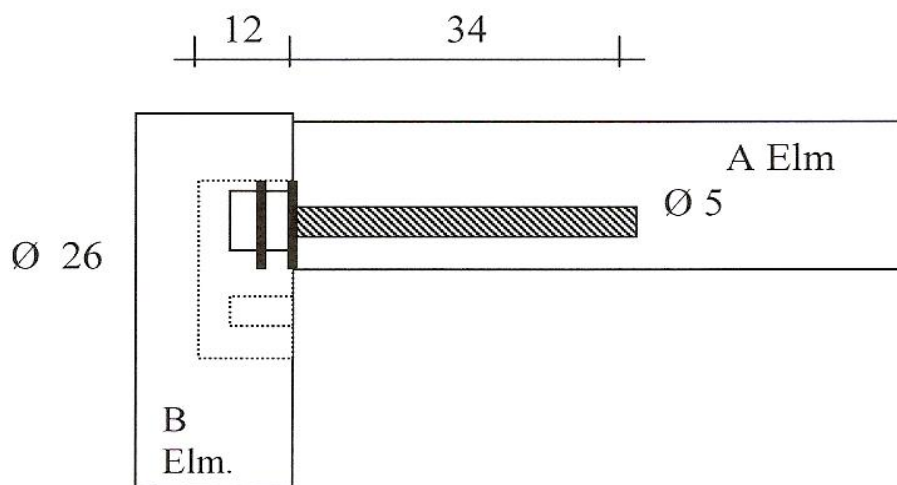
Details of L-type specimen joined with plastic minifix (in mm).
